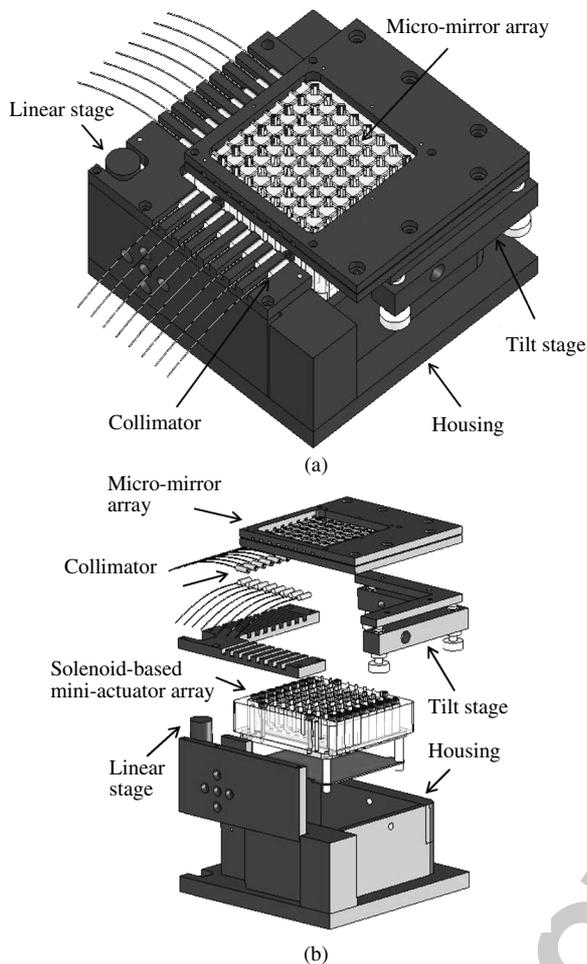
(a) The schematic drawing of the proposed 8×8 optical switch. (b) The corresponding exploded view of the switch
